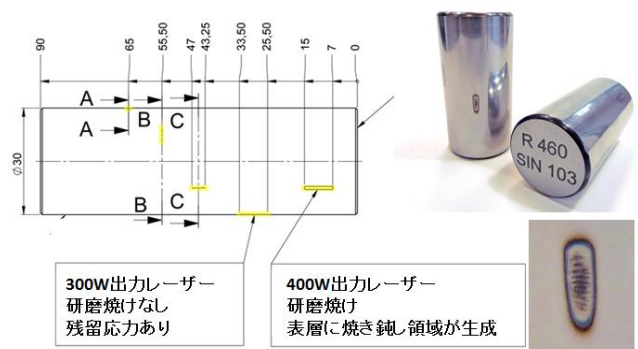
Work piece with grinding burn, residual stress and crack
